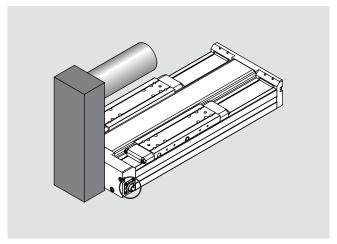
screw drive with coupling and intermediate plate (Mounting condition 02)
